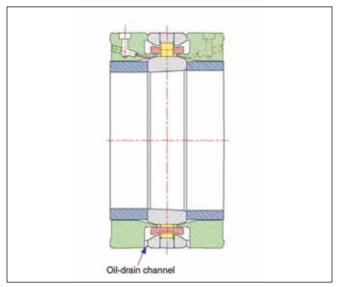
Standard-structure, NU-type cylindrical roller bearing.
